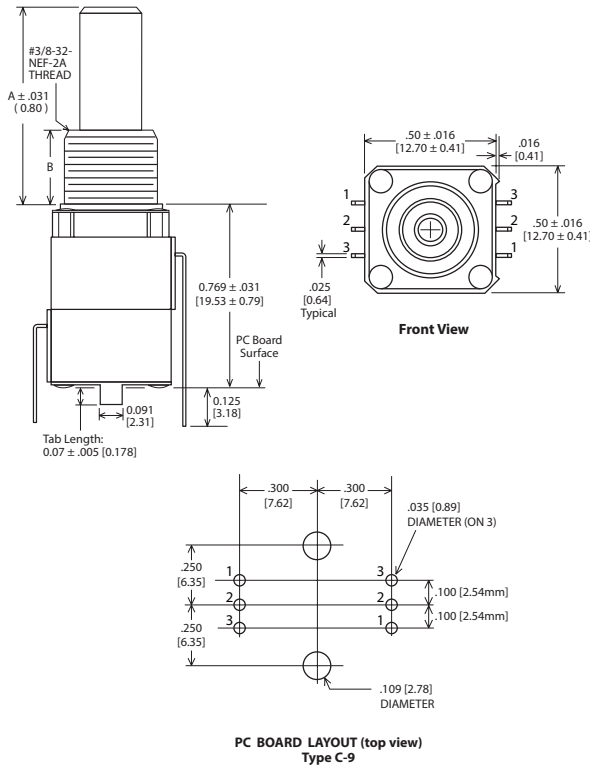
A20: A-20 Dual Potentiometer or RS, PC Pin Terminals, 3/8" Dia. Bushing
